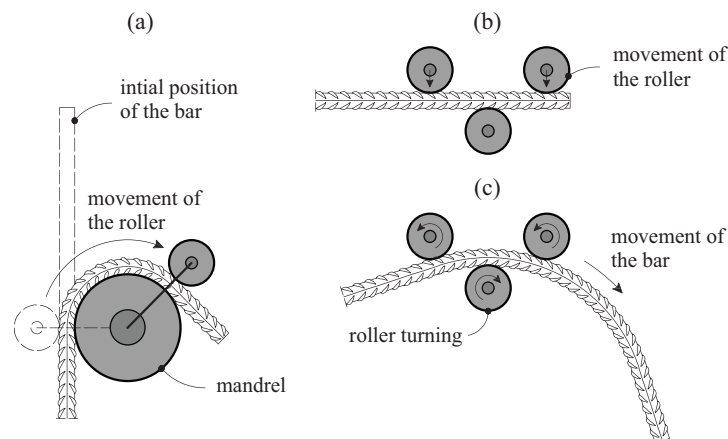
Bending machines: (a) classical bending machine using mandrels; (b) three-roller bending machine with its initial position; and (c) three-roller bending machine during the process of bending.
